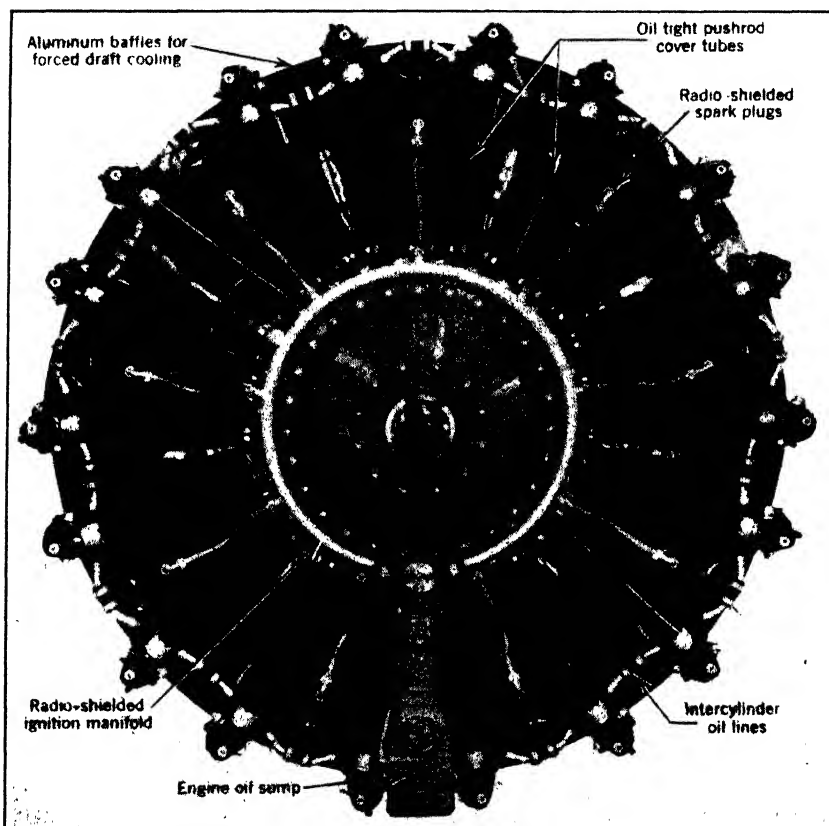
Front view of Pratt and Whitney Wasp air-cooled radial airplane engine.
